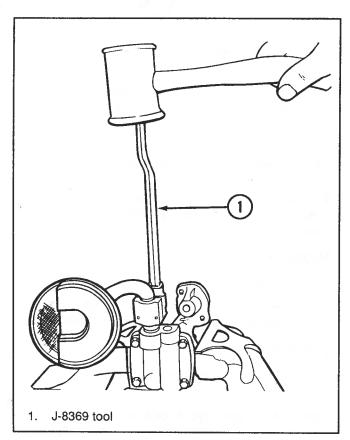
Installing New Pickup Screen And Pipe Assembly
